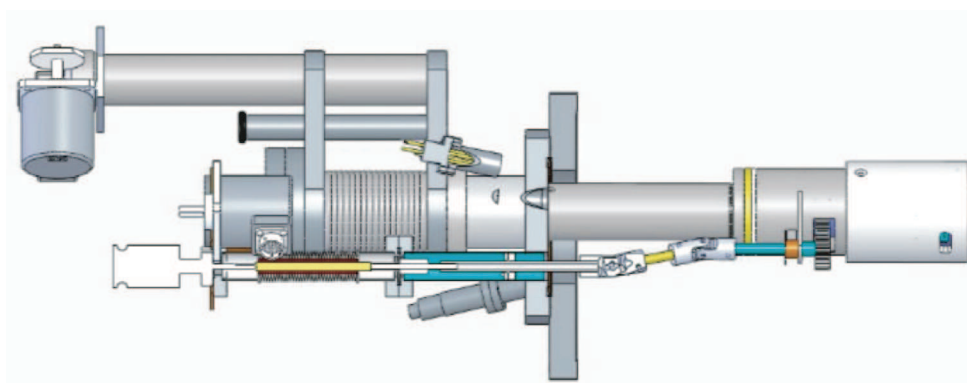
CAD drawing showing new FILD with detector head on the right (plasma) side.
